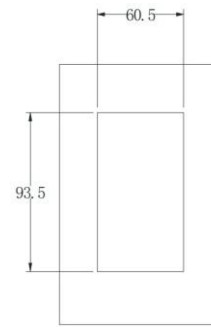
External Keyboard with Tray Installation Cutout Dimensions
